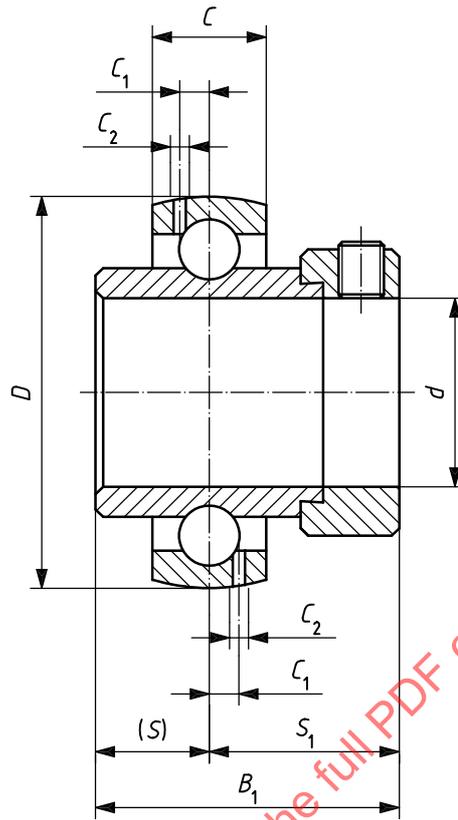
Bearing with eccentric locking collar — Wide overall width
